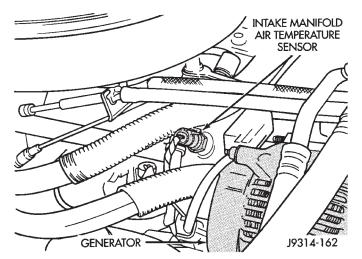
Air Temperature Sensor—5.2L/5.9LEngines— Typical
